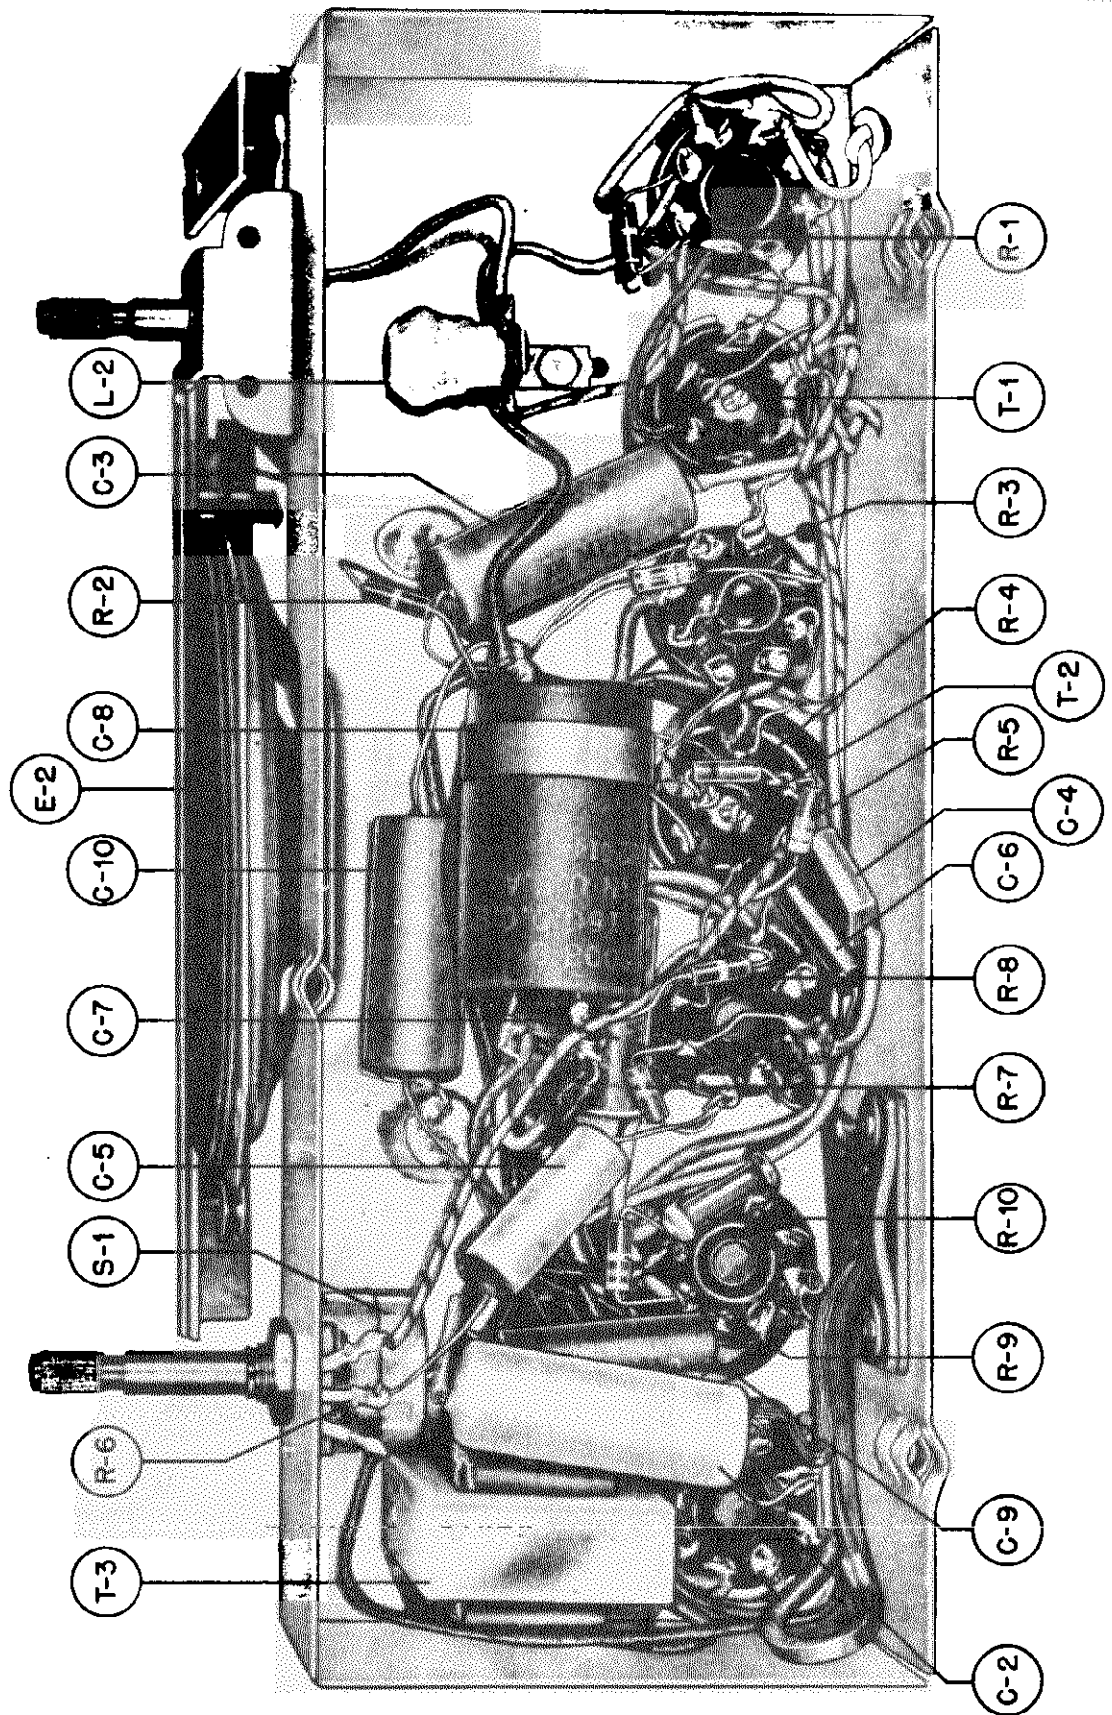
BOTTOM VIEW (CHASSIS HS-50)
